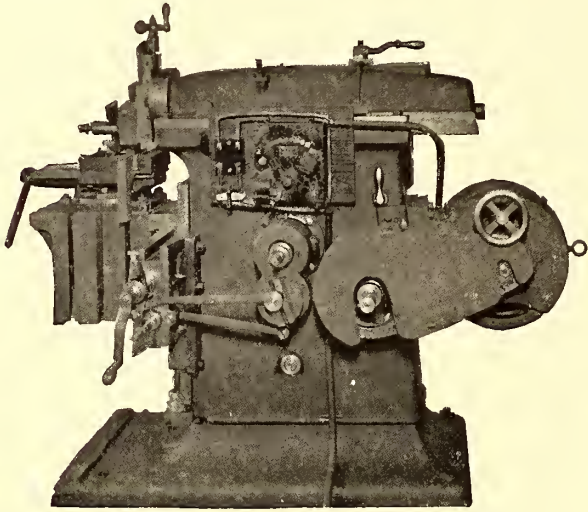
SHOWING 2-HP MOTOR MOUNTED AT SIDE OF 16-IN. SHAPER
